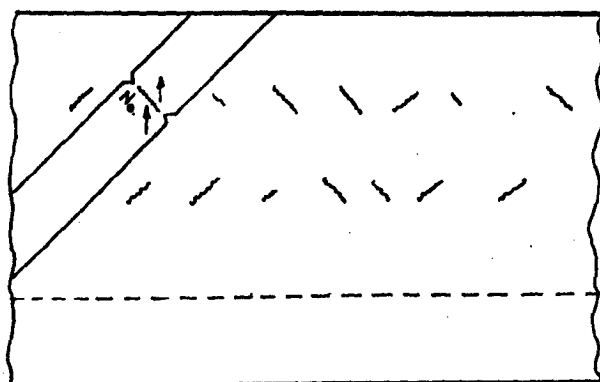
Type and location of the tensile specimens in the section of weld metal.
